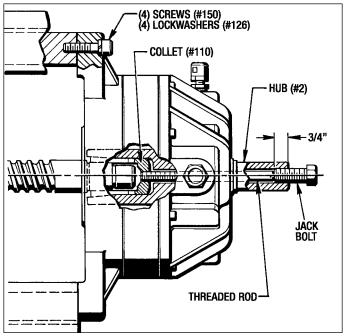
Loosening Collet (#110) from Hub (#2)
